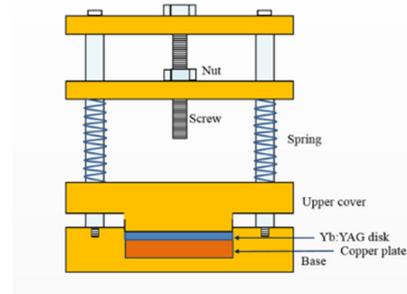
Configuration of fixtures for Au-Sn soldering of Yb:YAG/Cu composite.
